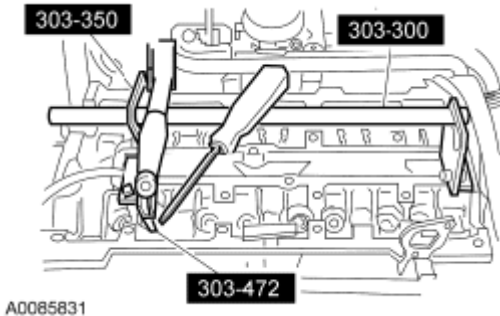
Identifying Valve Spring & Valve Spring Retainer Special Tools
